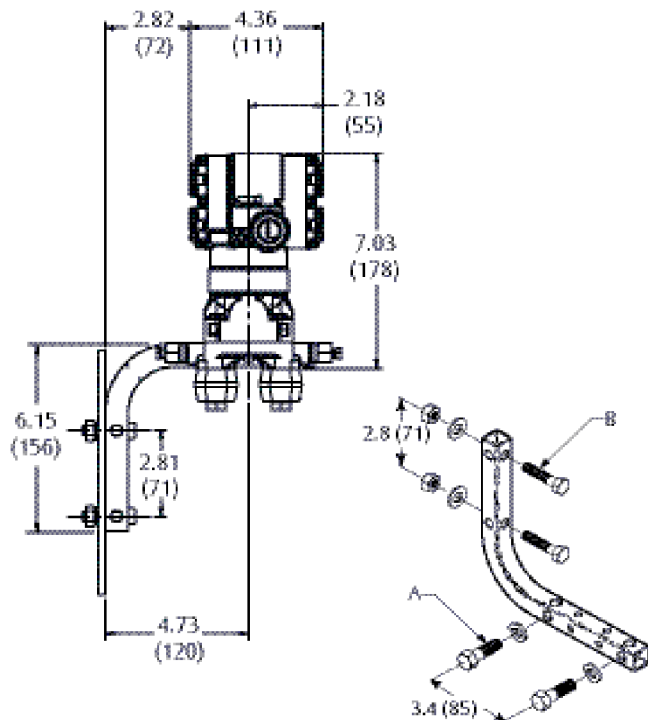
Rosemount 2051C Coplanar with Rosemount 305 Three-Valve Coplanar Integral Manifold
